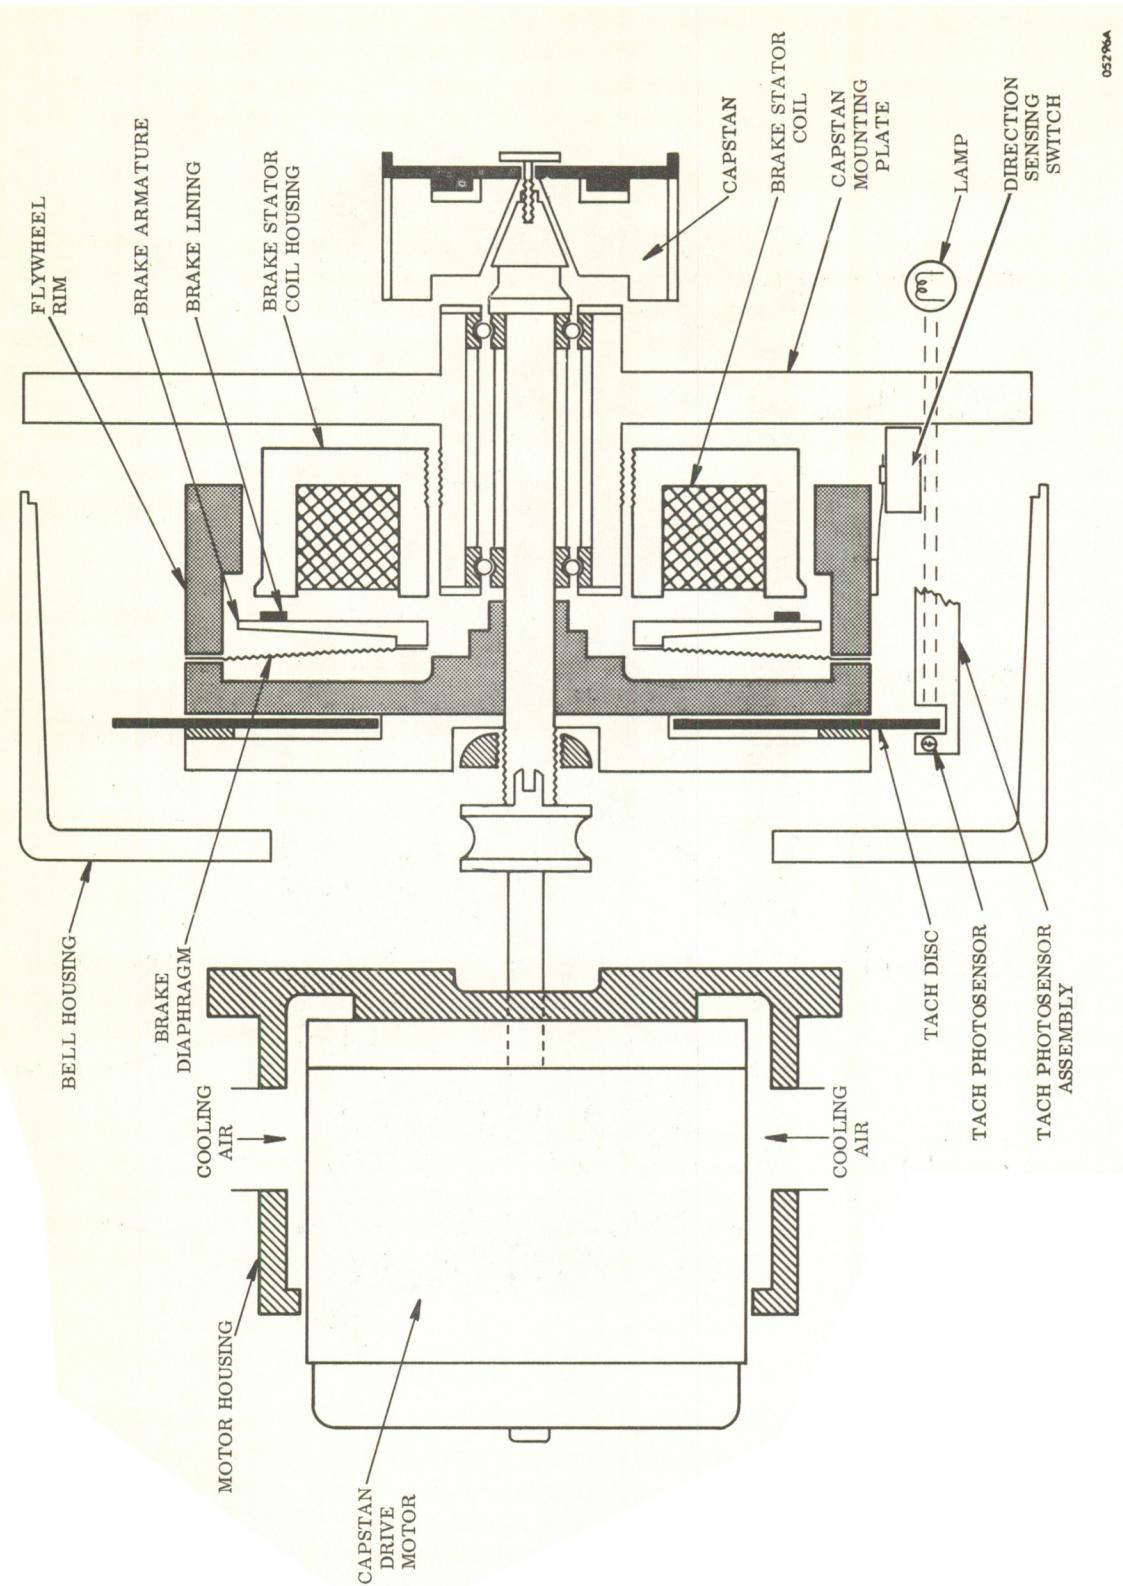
2-3. Capstan Drive Mechanism, Cross Section
